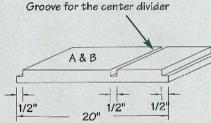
Cut the groove for the center divider and the rabbets for the side pieces in both the top and base pieces.
